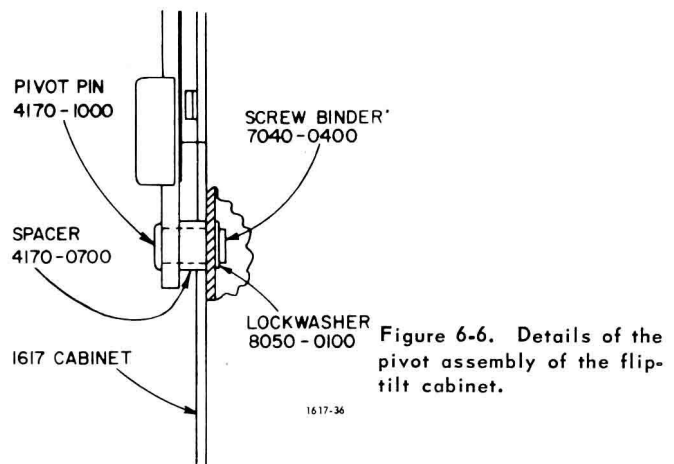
Details of the pivot assembly of the flip-tilt cabinet.
